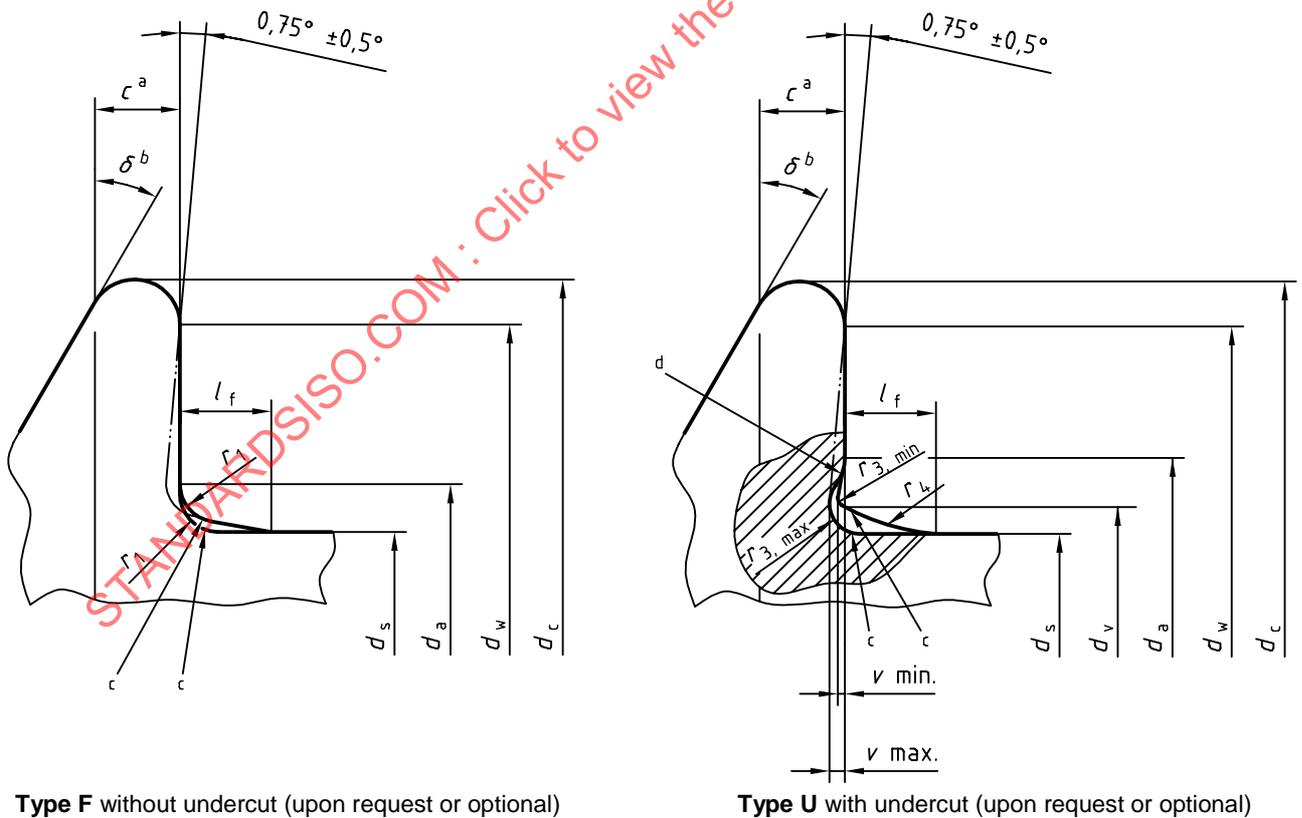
Hexagon bolt with flange — Full shank (standard type)
